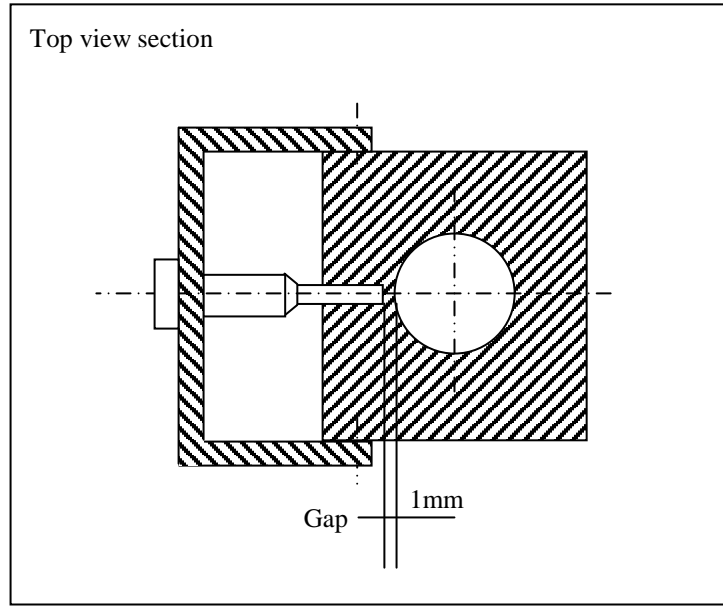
Sketch of the Side Pressure Measuring Device (top view section)
